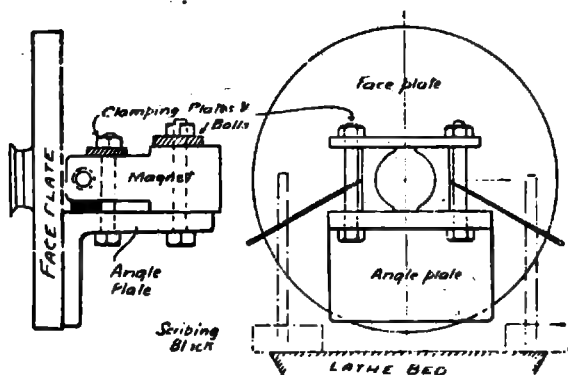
Setting up Field-magnet on Lathe for Boring Tunnel
